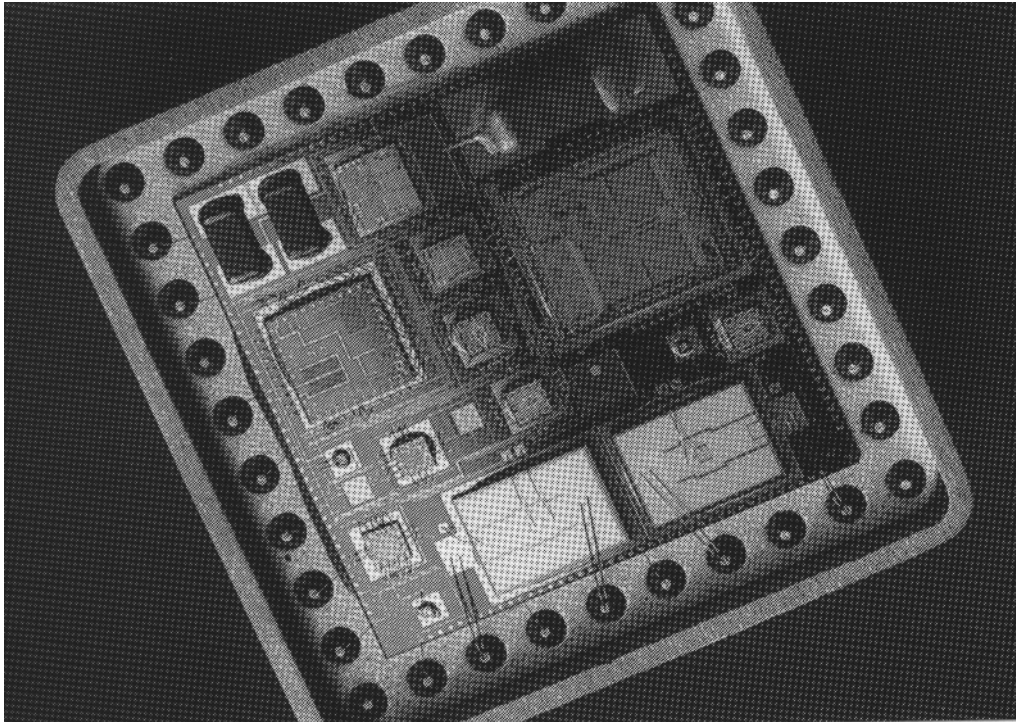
With the multilayer ceramic module it is possible to combine hermetically sealed, wirebonded Si chips in a cavity with lid, soldered, surface mounted packaged chips, and soldered passive components.
